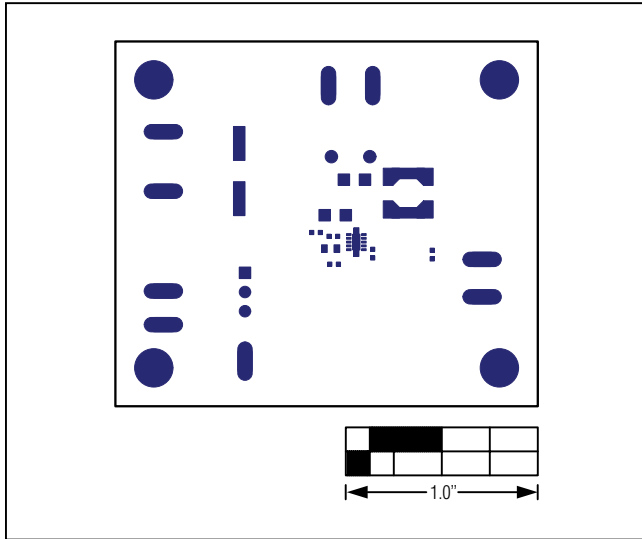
MAX17501B/MAX17501F EV Kits PCB Layout—Top Solder Mask
